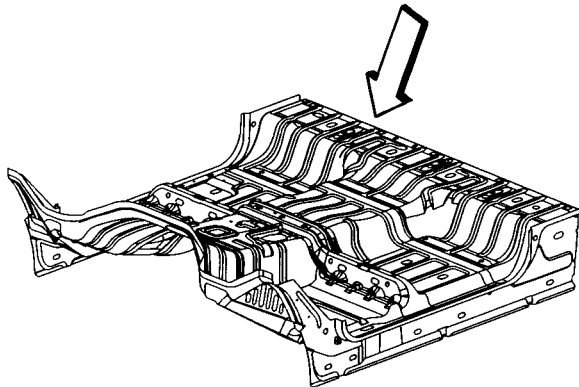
SEAT MOUNTING FRONT CROSSMEMBER - STANDARD CAB
